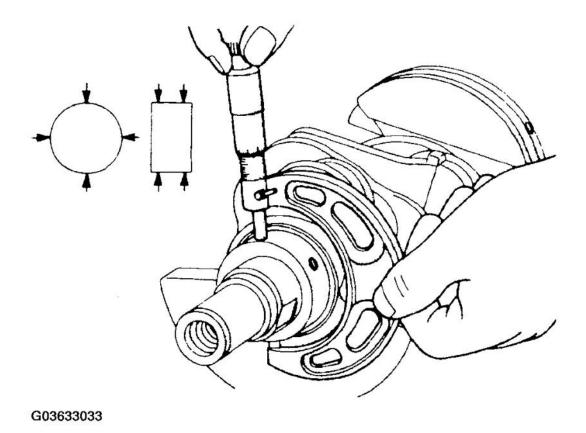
Measuring Crankshaft Journal Courtesy of DAIMLERCHRYSLER CORP.
